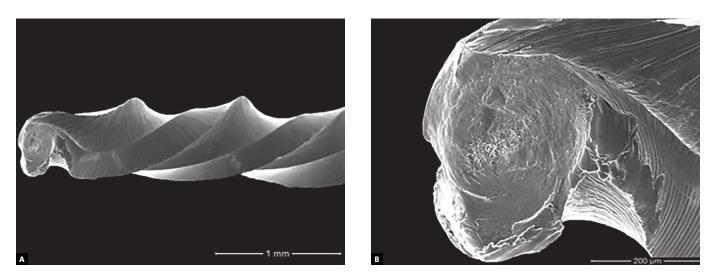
A) Helical shaft plastic deformation - WaveOne Large file (100x magnification). B) Fracture surface and spiral reversion at fracture site (500x magnification).
